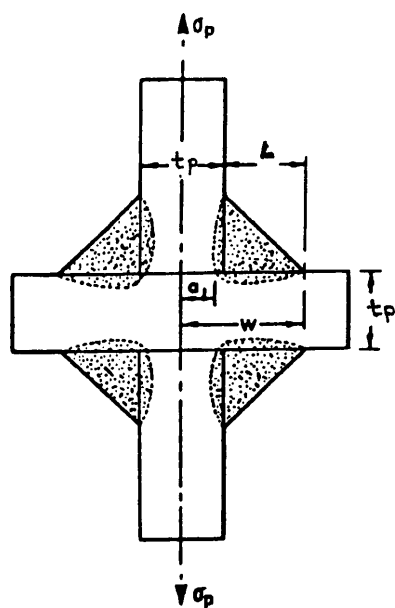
Cruciform Joint Geometrical Parameters^{ref 33 definitions}
